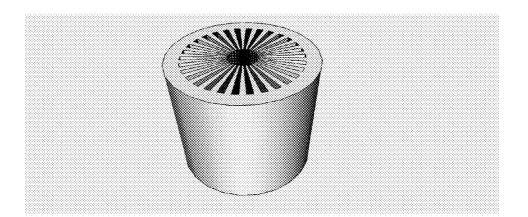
A SECTION VIEW OF TAILOR-MADE MOLD
